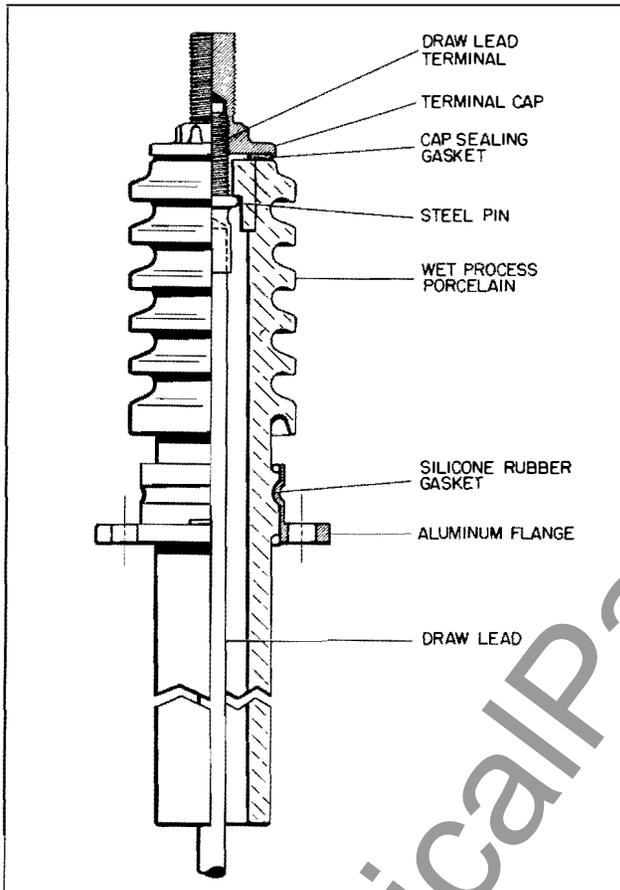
Typical Cross-Section of "RJ" Draw Lead Bushing
